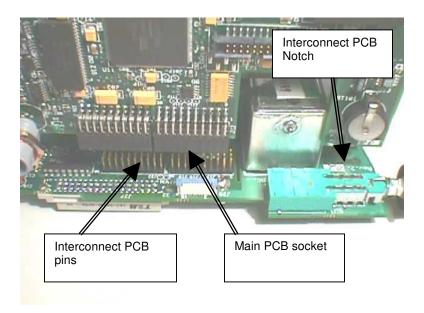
Line up Interconnect PCB pins to Main PCB socket
